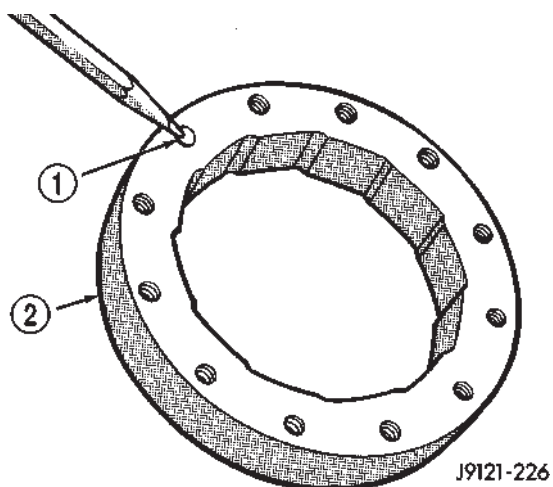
Location Of Non-Threaded Hole In Clutch Cam
